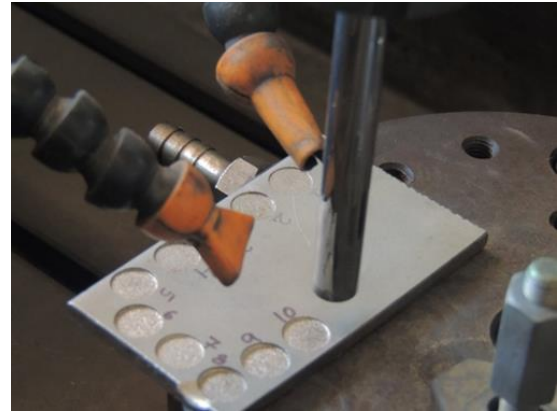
Die Sinker EDM machine setup with tool and work piece (Model: ELECTRONICA -ELECTRAPLUS PS 50ZNC)
